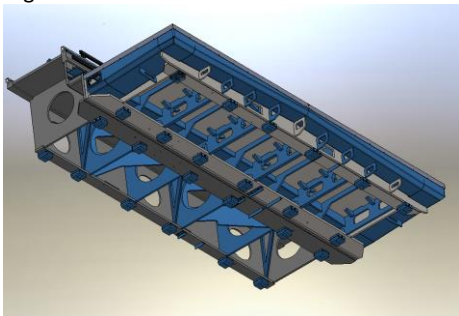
CAD model of a machine tool bed, with parts highlighted for removal.
